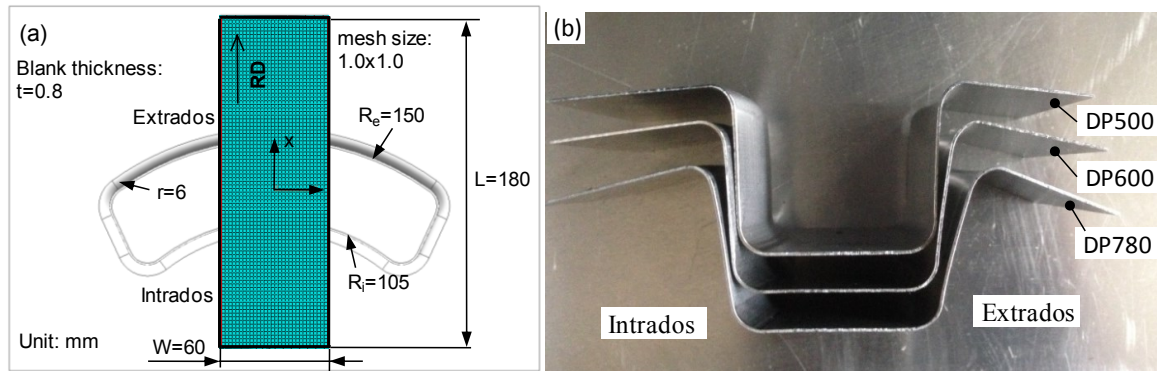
(a) An illustration of the location and geometry of initial blank (b) deformed experimental parts after springback.
